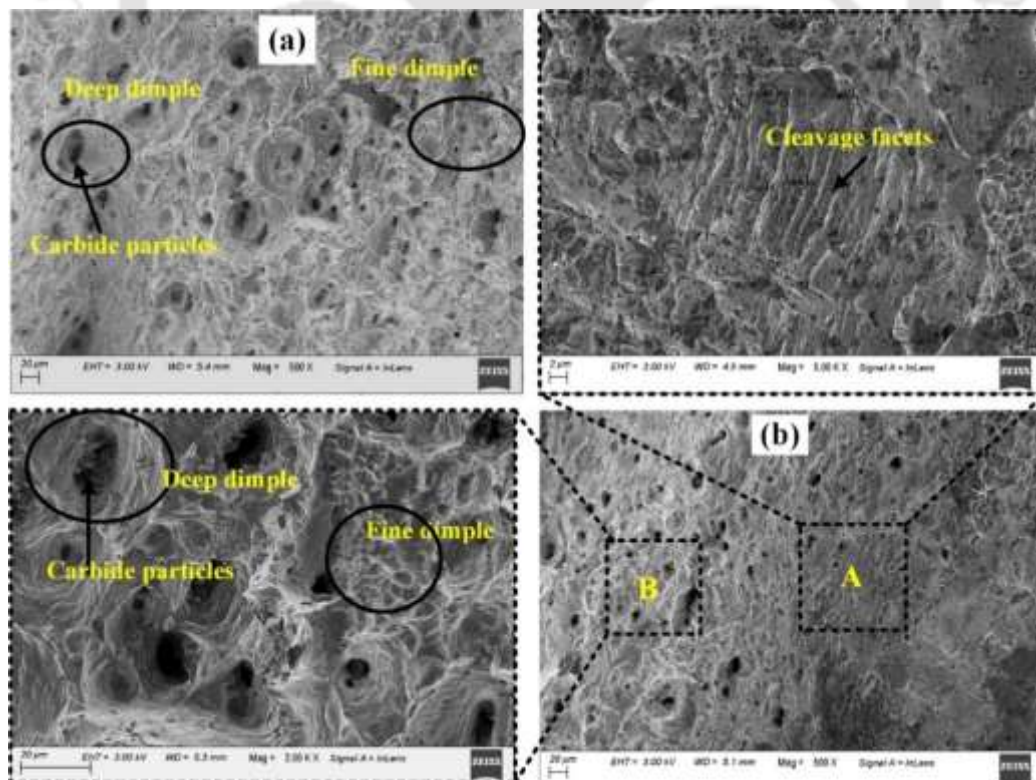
SEM fractography of (a) tensile sample of Test 2 and (b) Test 3.
